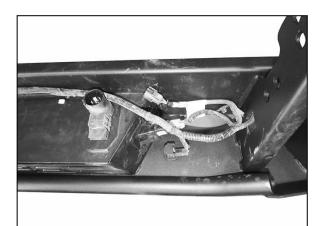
Sensor assembly mounted to the sensor sleeve on the back of the Bumper
